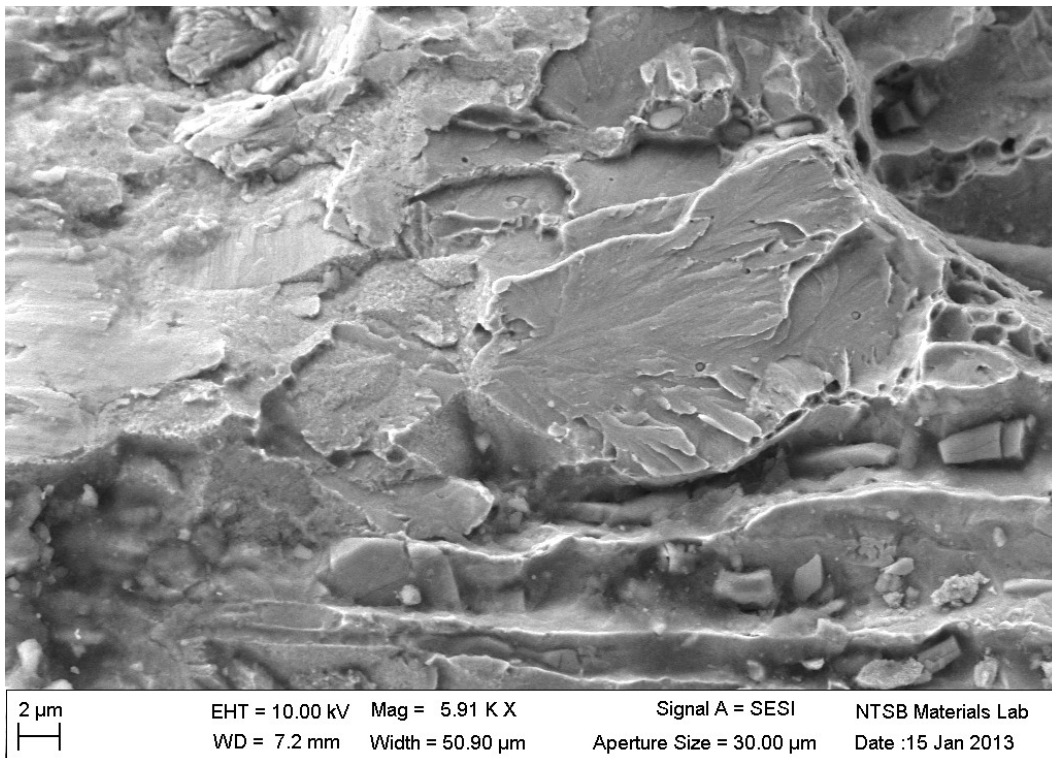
SE micrograph of cleavage facets on the nitrided area of the output gearshaft fracture surface.
